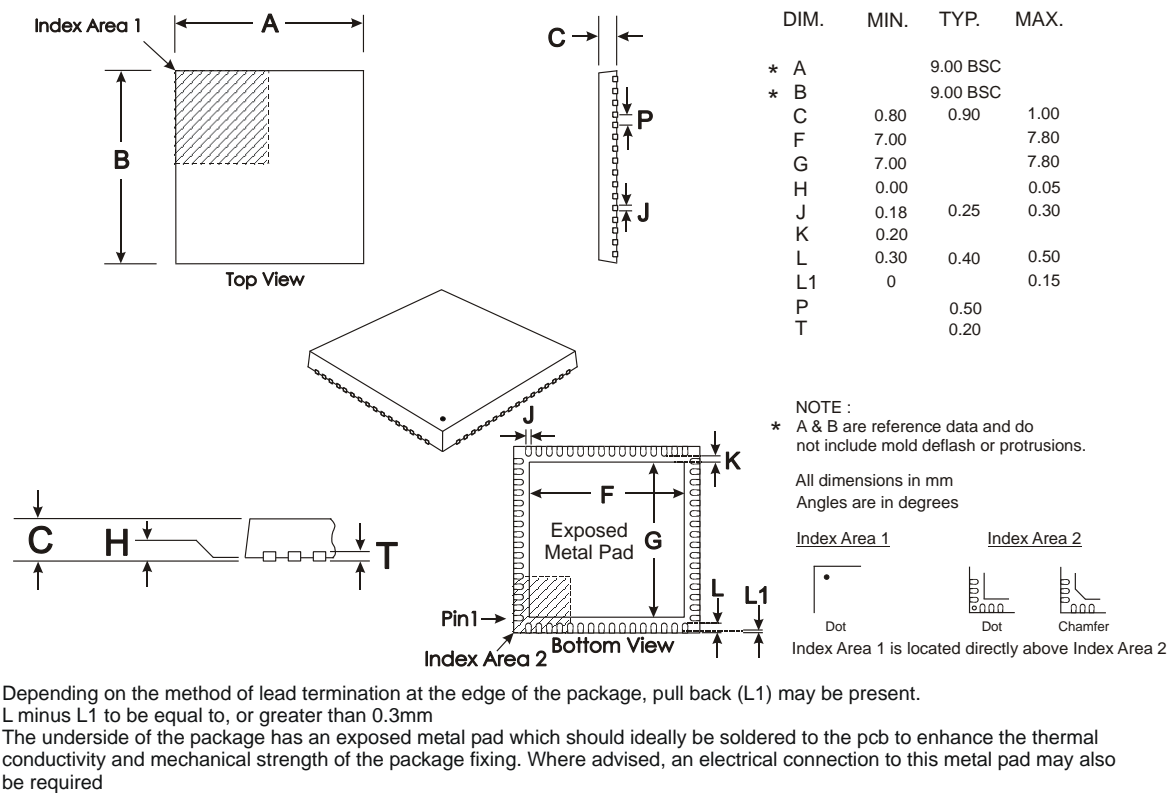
Mechanical outline for 64-pad VQFN package (Q1)
